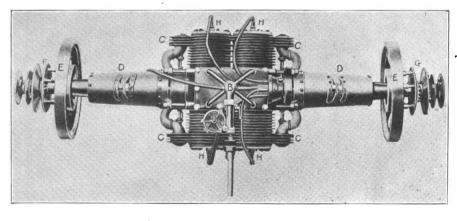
THE HOLSMAN MOTOR AND PARTS
